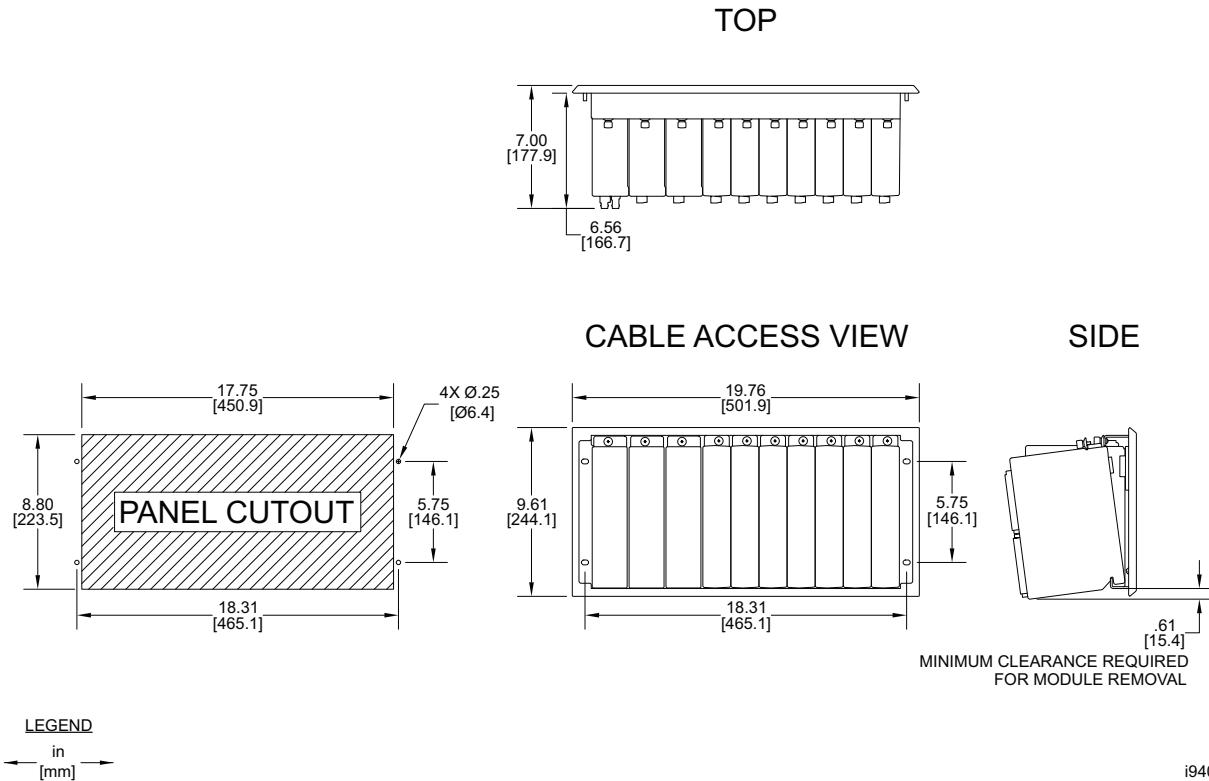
SEL-2240 Dimensions for 10-Slot Panel Mount
